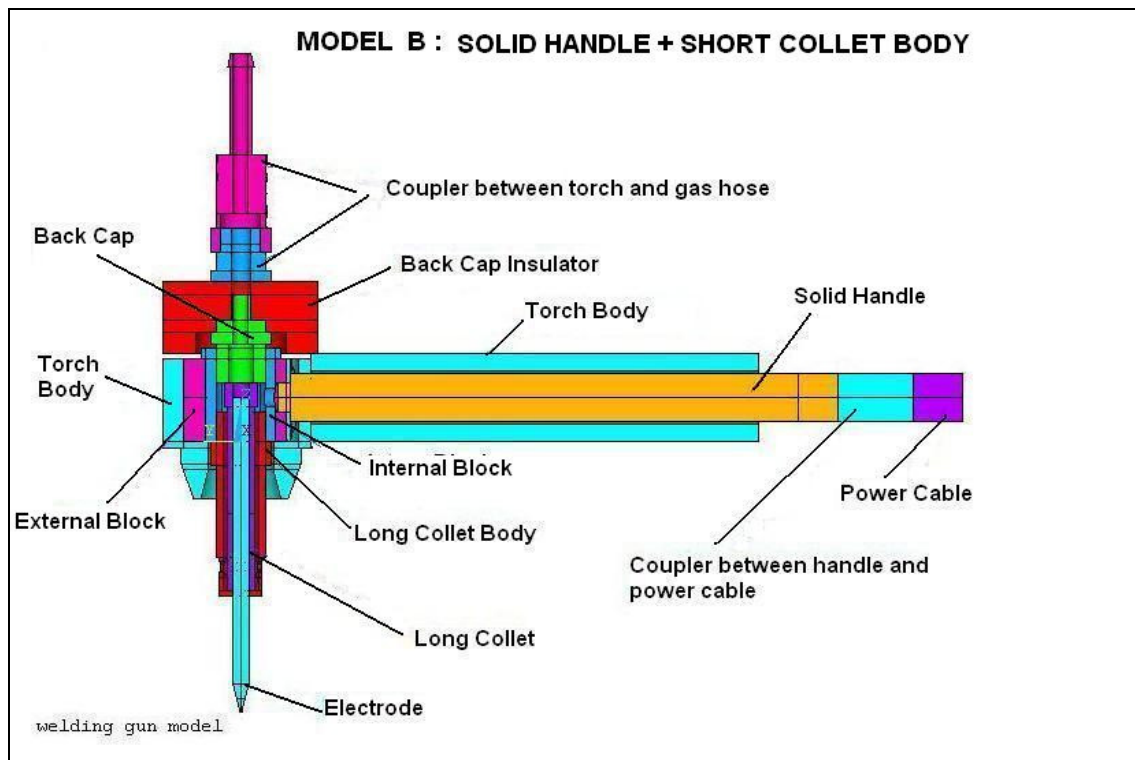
Cross-sectional view of welding torch model B.
